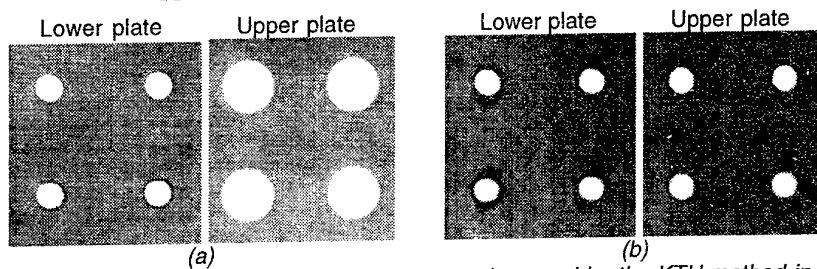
Extent of hole machining defects (the dark areas) caused by the KTH-method in specimen A-7 (a) and by a cemented carbide drill in specimen B-7 (b).
